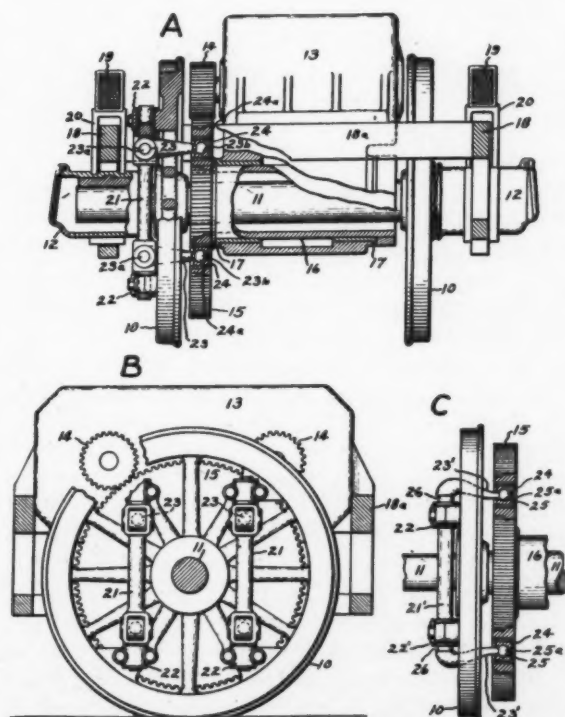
A—Construction showing the embodiment of flexible coupling. B—Side elevation of the structure. C—Modification of coupling between the driving gear and wheel
